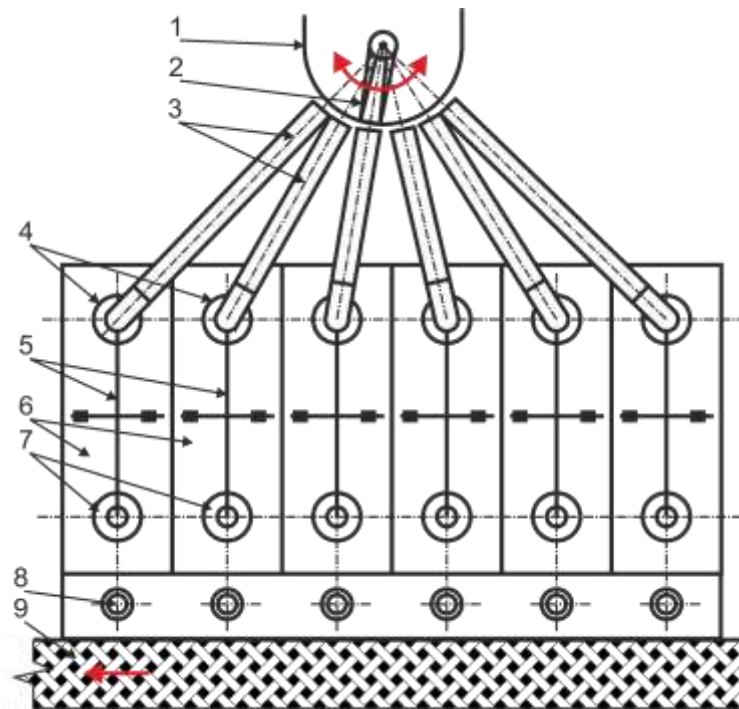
Floor plan of the six-section machine layout: 1 - feeder, 2 - gob distributor, 3 - chutes, 4 - blank mould, 5 - invert, 6 - individual sections, 7 - finish mould, 8 - dead plate, 9 - conveyor
